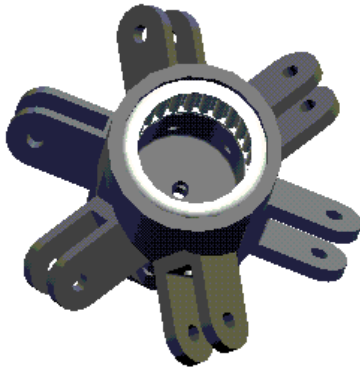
The rear view of the new hub design, showing the location of the needle roller bearing
